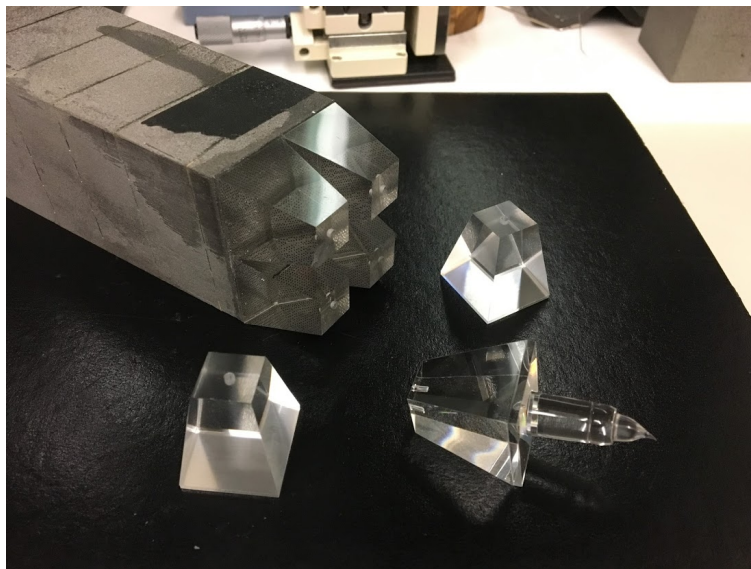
Light guides produced by injection molding showing parts after removal from the mold, after machining and finally glued onto absorber block.
